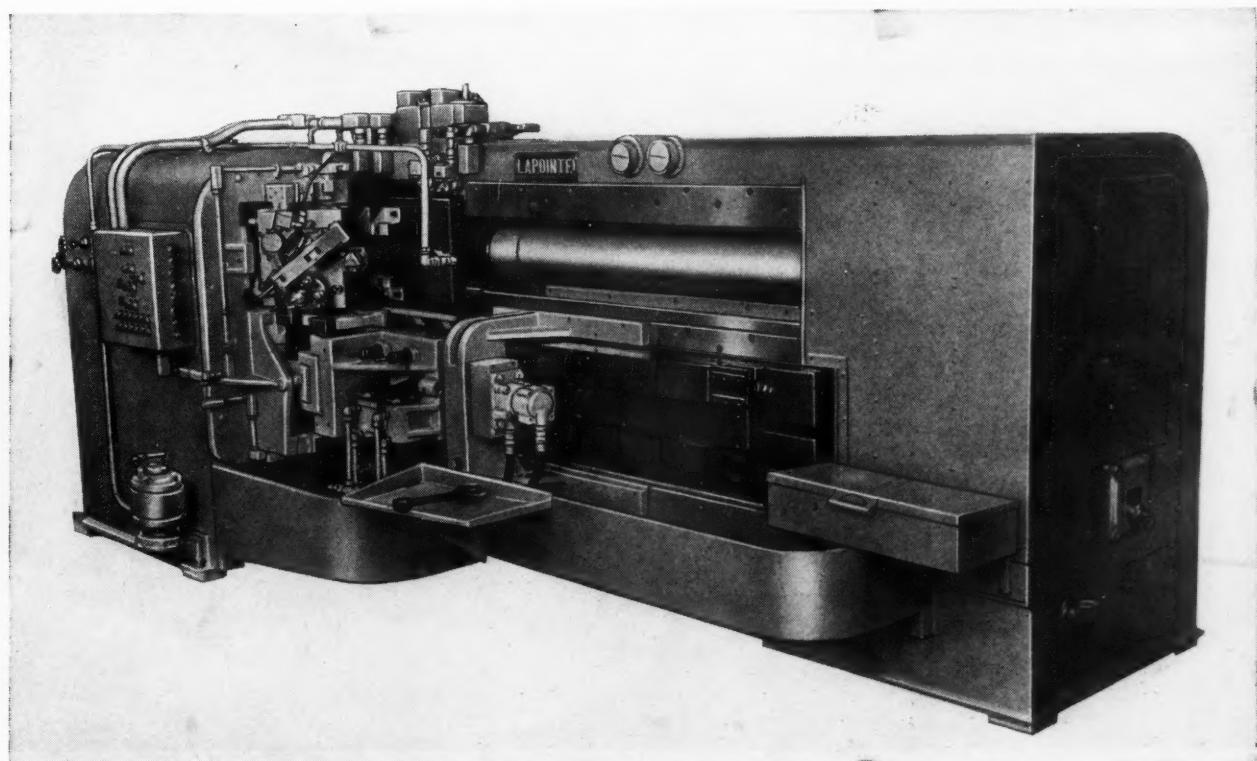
Lapointe double-ram horizontal surface broaching machine with fully automatic push-button control
